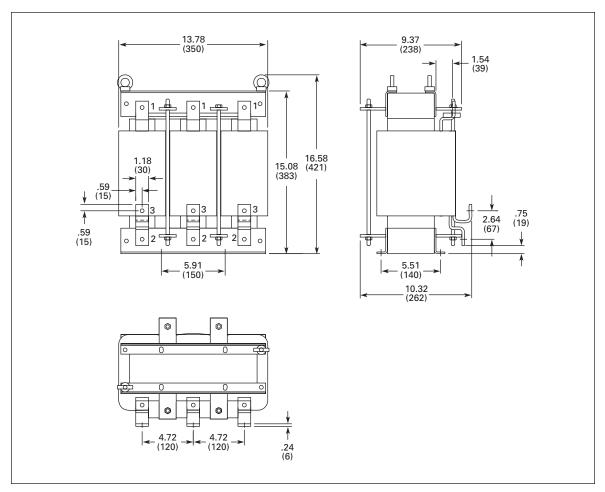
AC Choke (CHK0400) Dimensions Approximate Dimensions in Inches (mm)
